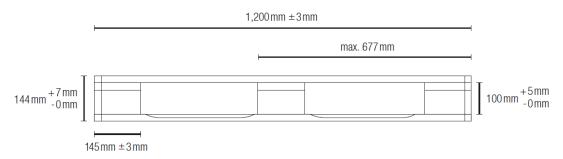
Dimensions and tolerances EUR pallet from 1200 mm side
